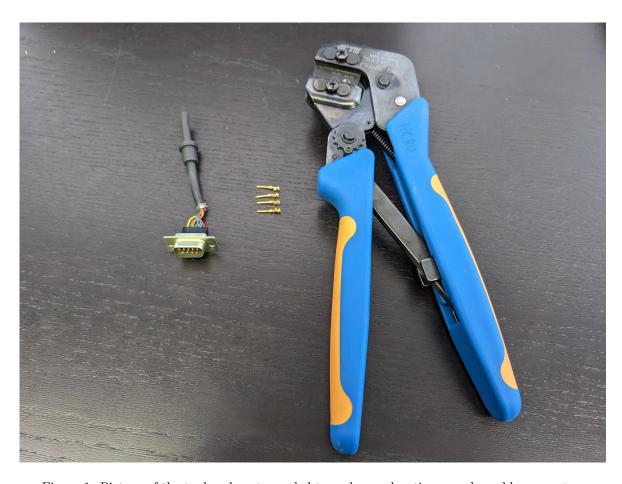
Picture of the tool and parts needed to make an elevation encoder cable connector.
